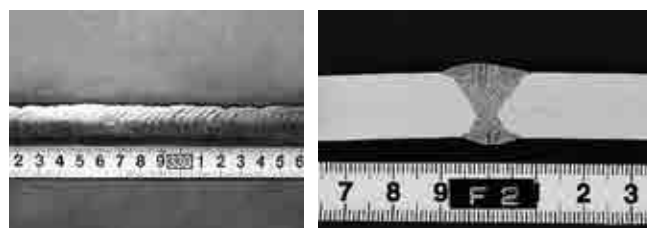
Bead appearance and macrostructure of DW-308L-XR butt joint weld metal (1G position)
